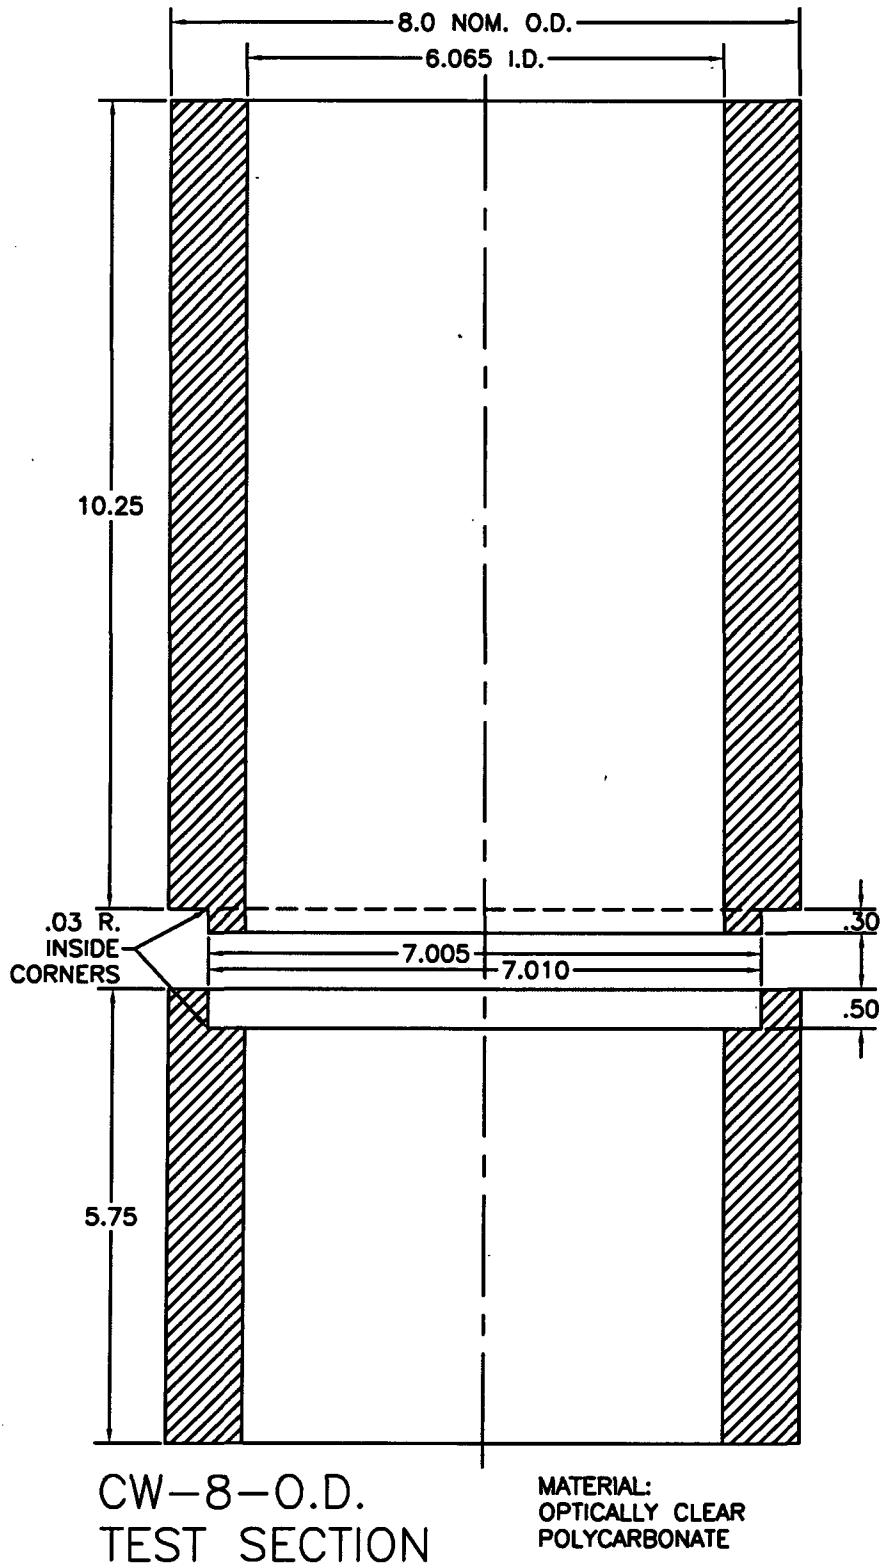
Schematic Detailing the Dimensions of the Transparent Test Section
